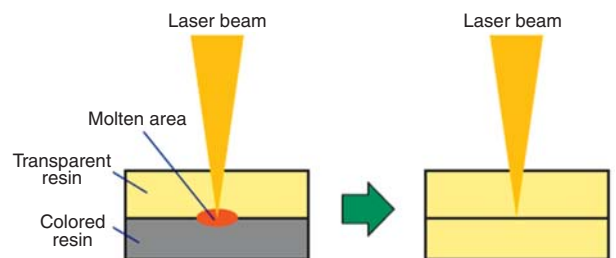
Conventional laser lap welding vs. laser lap welding technique for joining resin members
